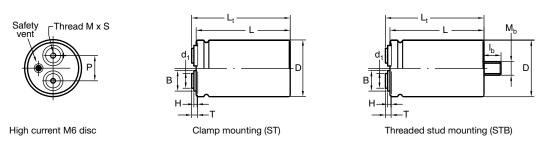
B - Mechanical drawings for high current M6 disc versions. For details refer to Table 1
